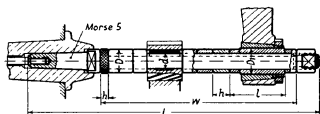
MILLING ARBOR WITH DISTANCE RINGS
